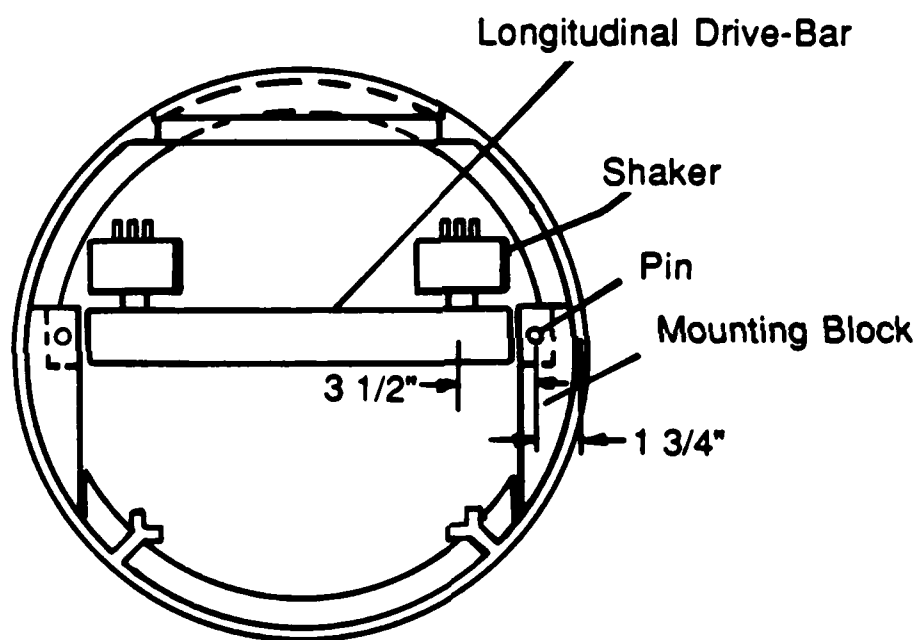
Shaker Mounting Arrangement for Longitudinal In-Plane Drives
